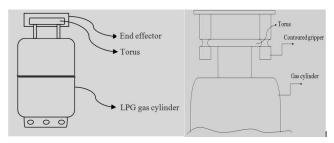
The integral assembly of epicyclic gear gripper on the cylinder top.
